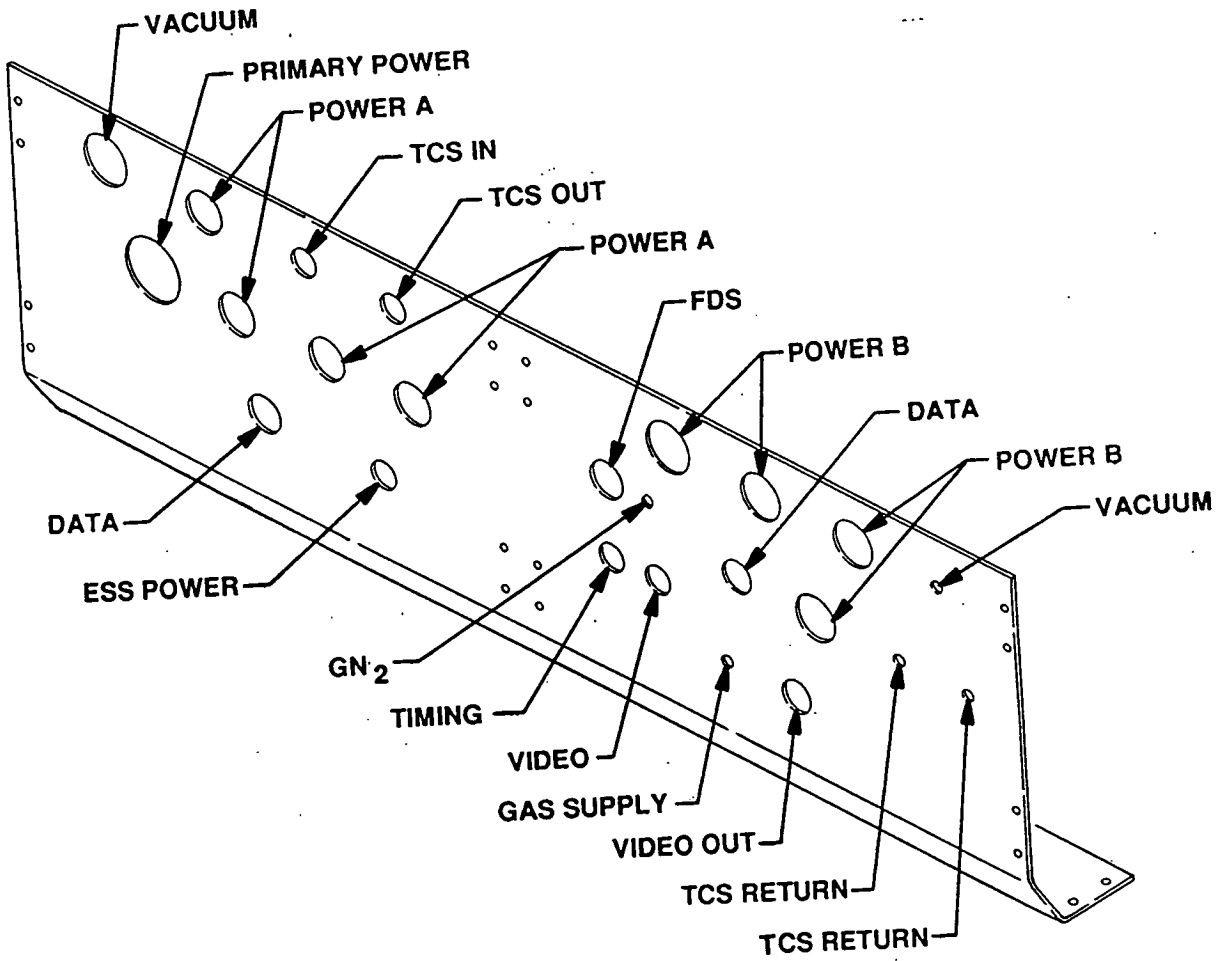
CORE RACK PANEL LAYOUT
